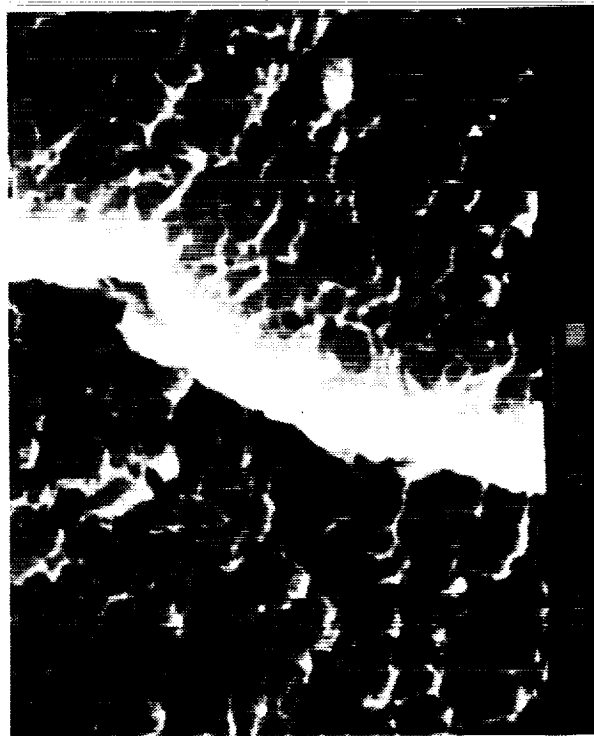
Fracture Surface of Unbonded, As-Rolled FVS0812/300
